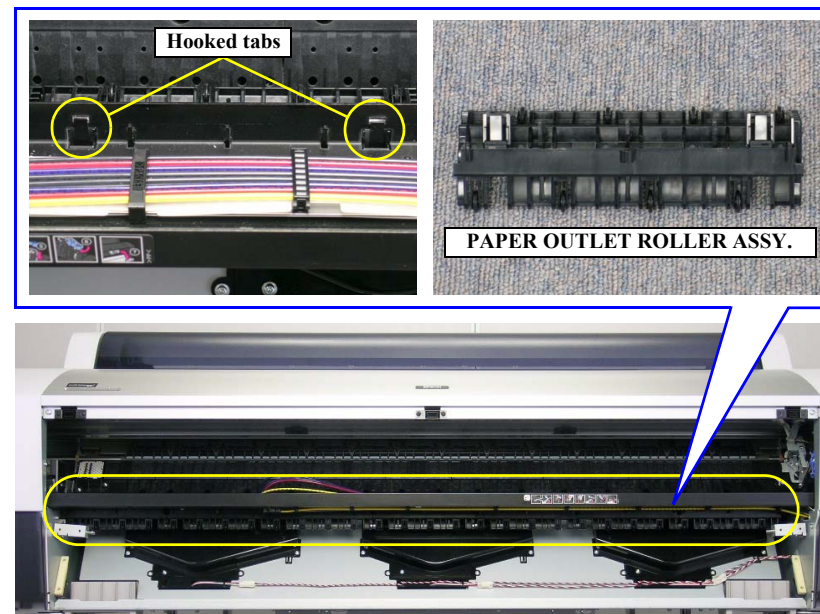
Removing the PAPER OUTLET ROLLER ASSY.
